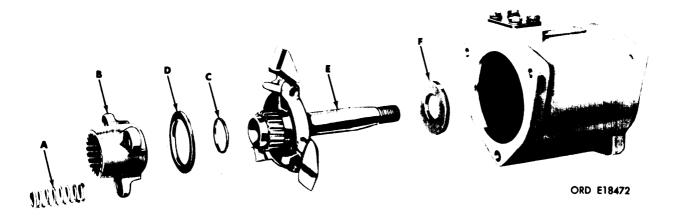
Removing sliding gear, spider assembly and associated parts.
